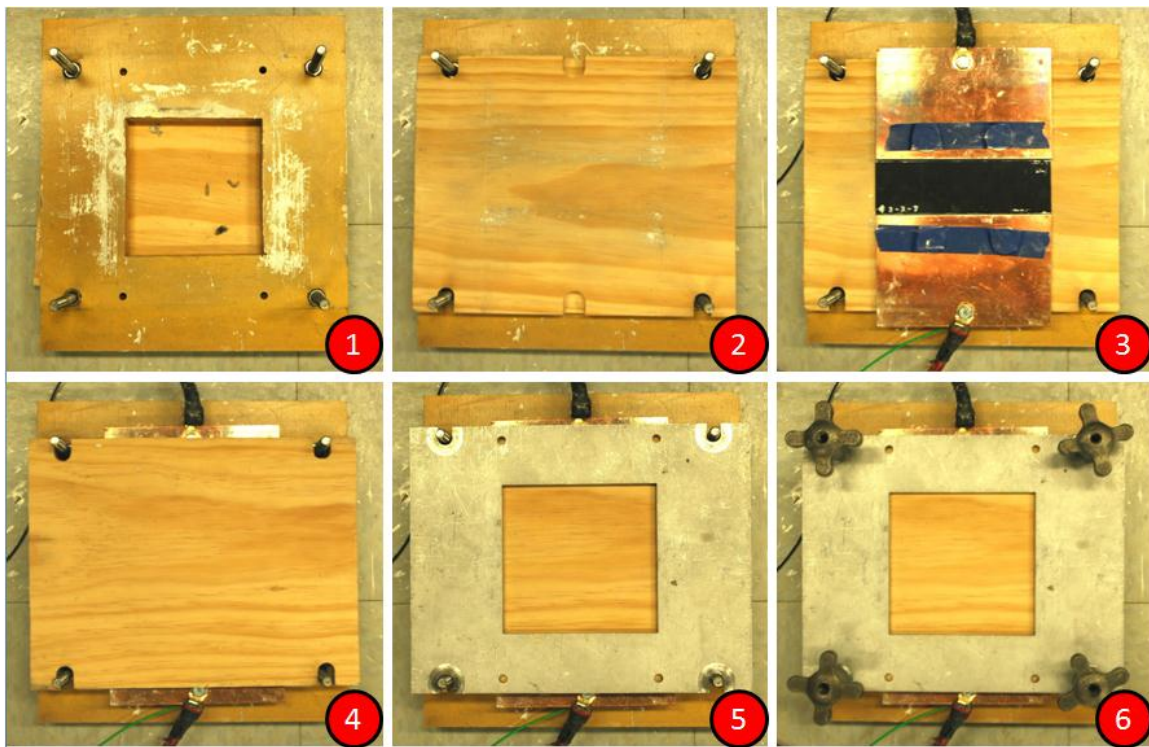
Steps for assembling two probe test fixture for narrow samples
